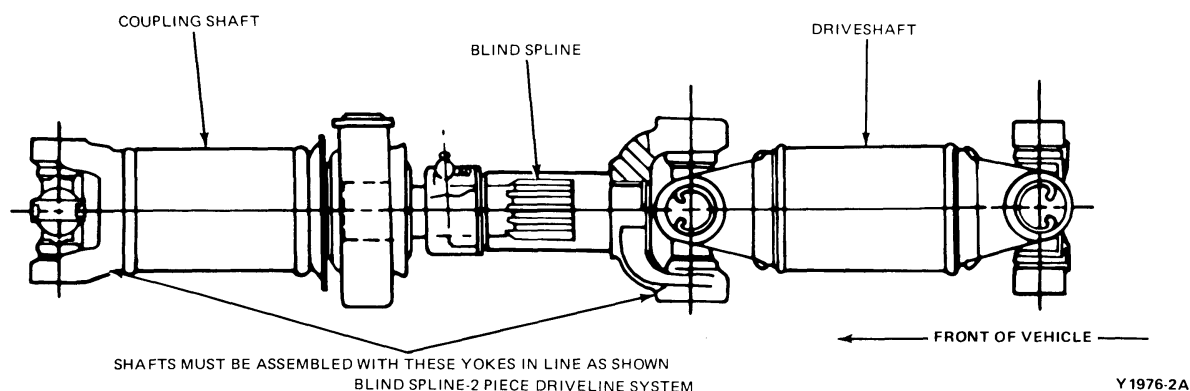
Driveshaft Phasing—Two Piece "Blind Spline" Driveshaft with Necked Down Coupling Shaft
